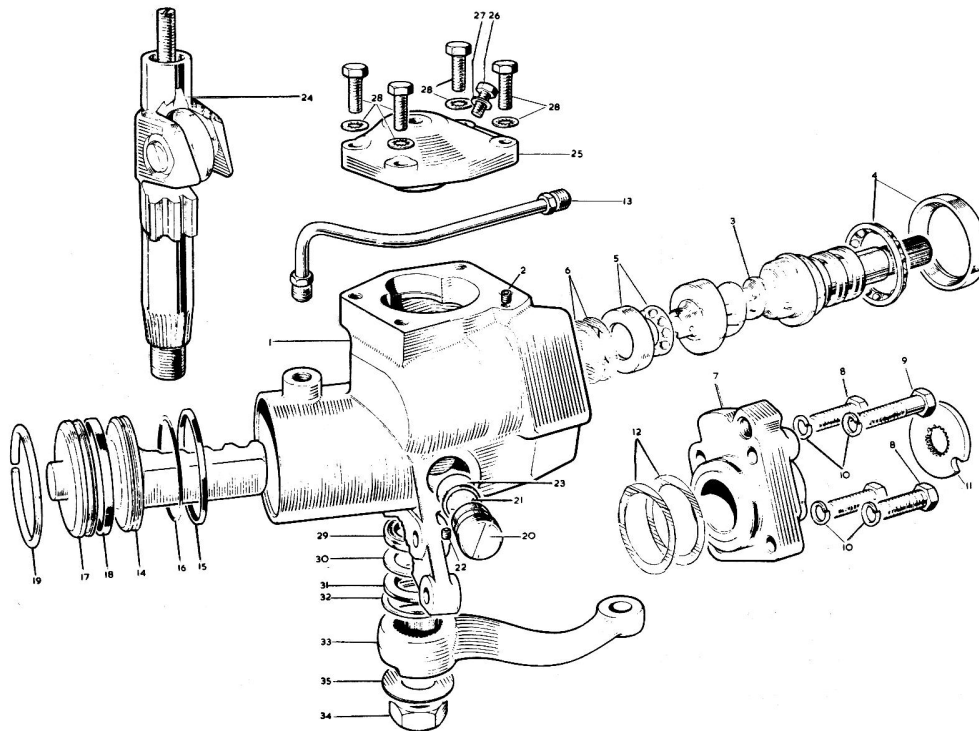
THE ADWEST POWER ASSISTED STEERING BOX
